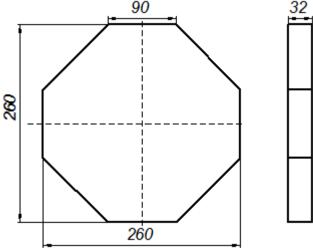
Steel plates for specimens I1 ... I 4 sealing. (Dimensions in mm).
